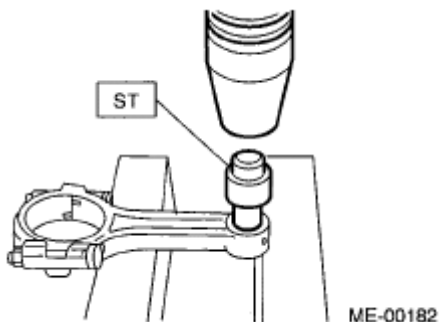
Removing Bushing From Connecting Rod With ST And Press
